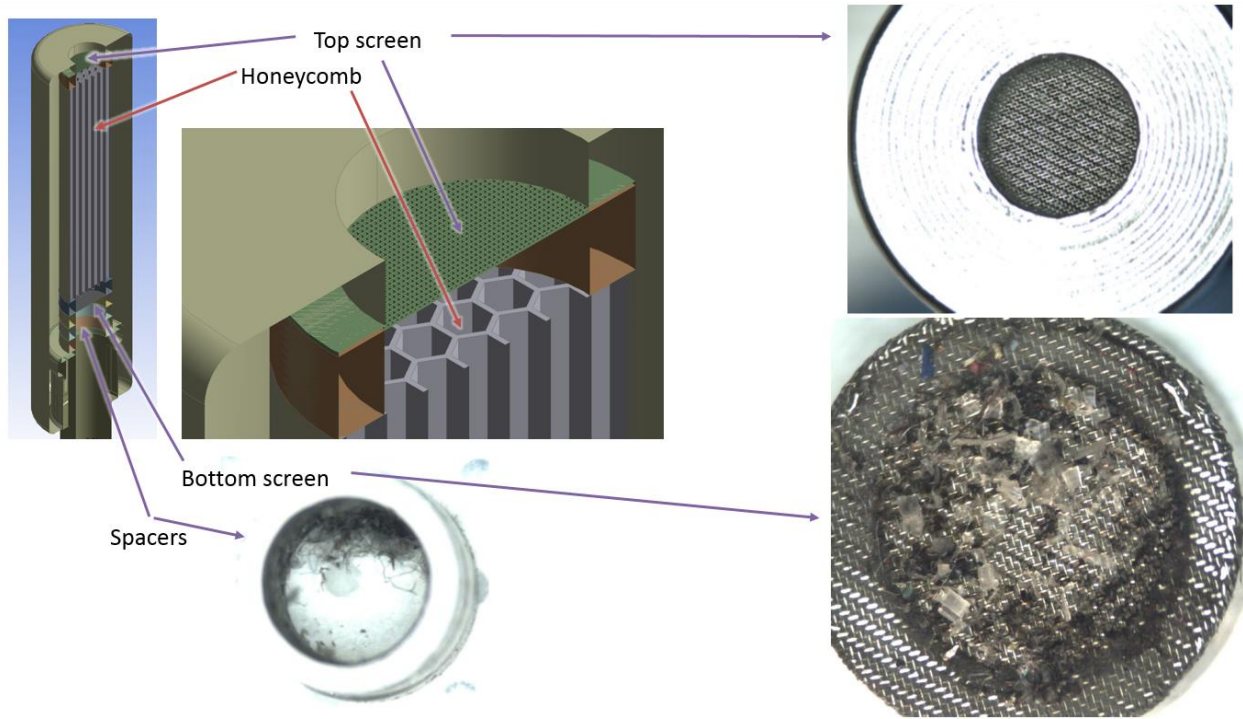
Nozzle configuration and screen blockage discovered after disassembly.
